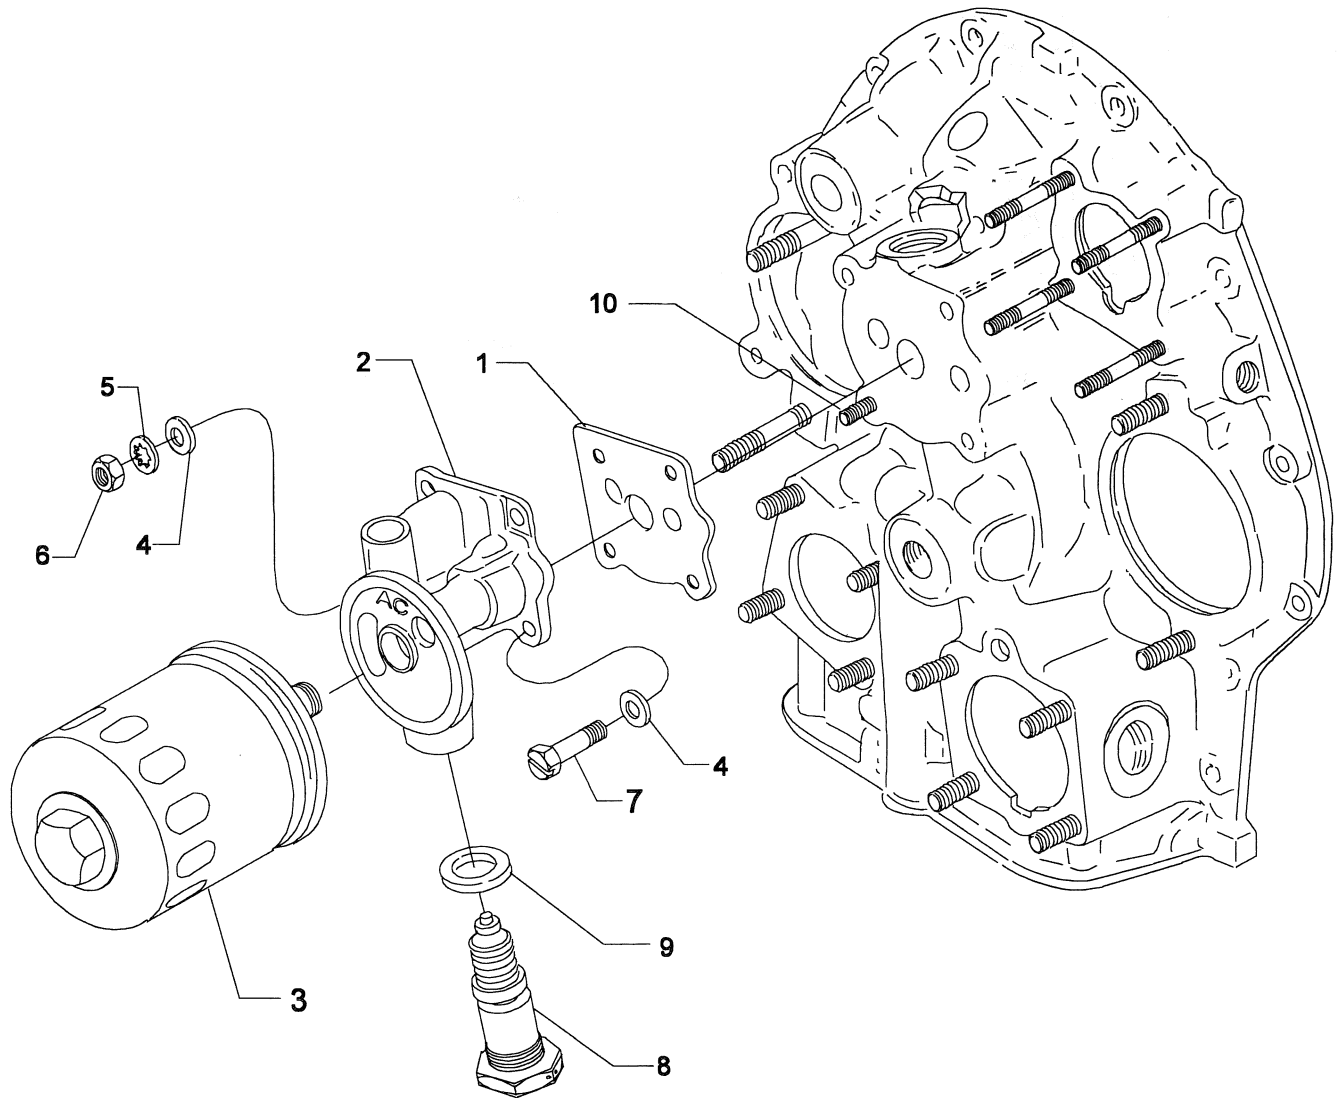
OIL FILTER ASSEMBLY AND OIL COOLER BYPASS VALVE
